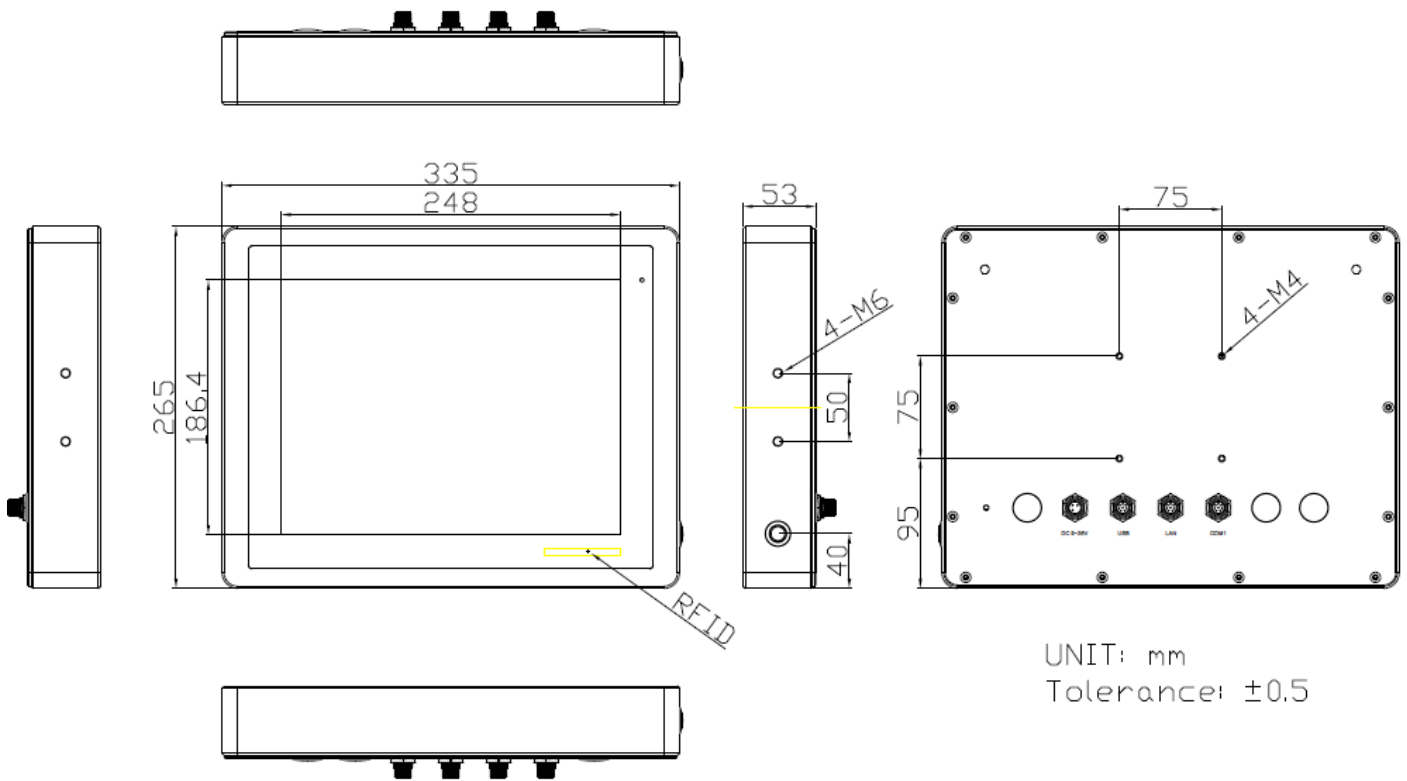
Dimensions of ViTAM-612P/R/G(H)
